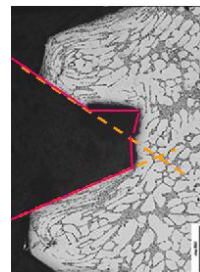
Deformed thread root in cast A356 following engagement and load transfer (in yellow initial shape)
